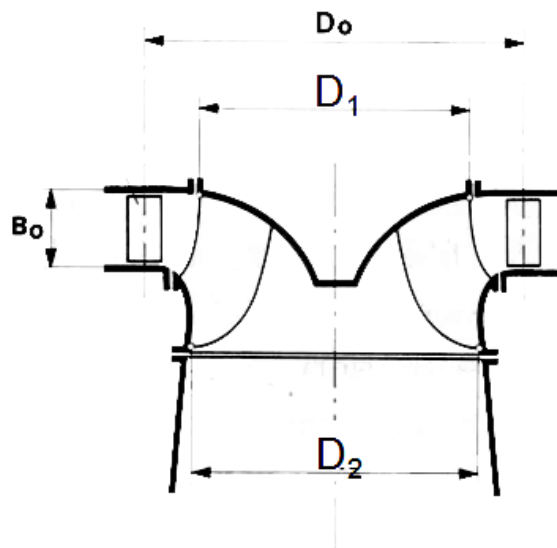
The axial view of a Francis runner, and the main dimensions, [7].
